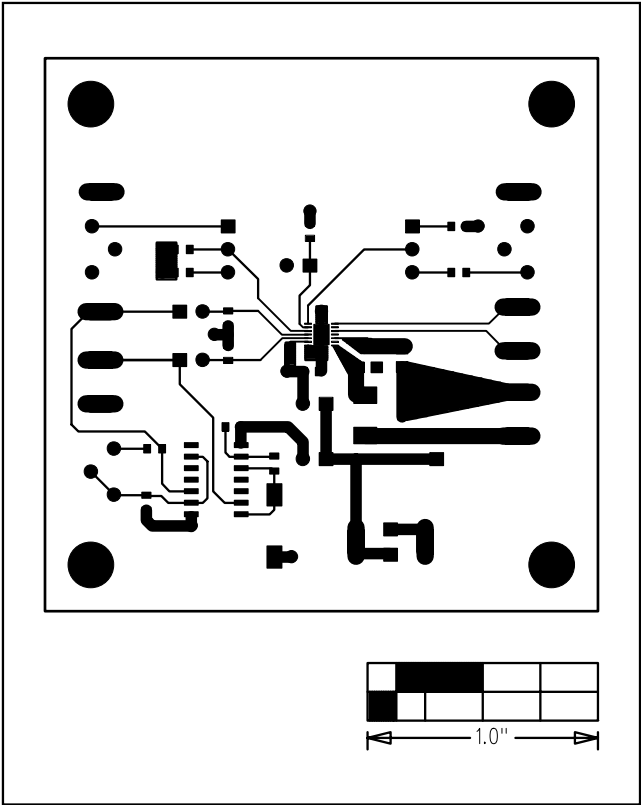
MAX4990 EV Kit PCB Layout—Component Side
